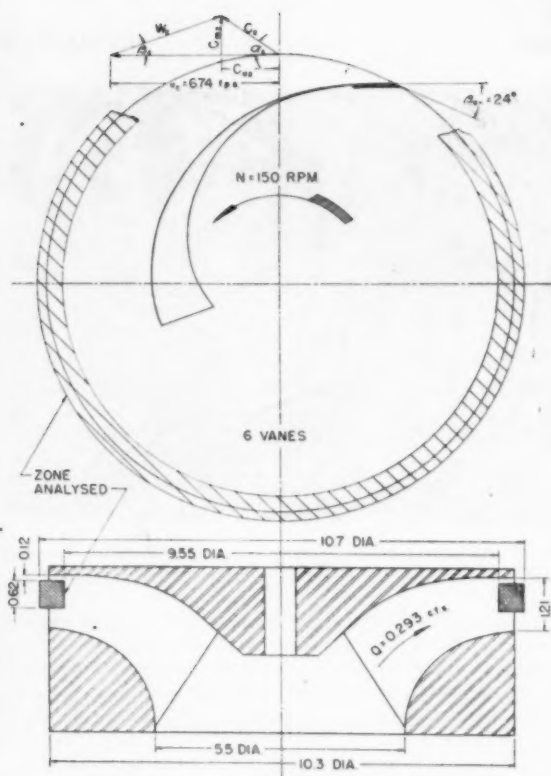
PRINCIPAL DIMENSIONS OF TEST IMPELLER
